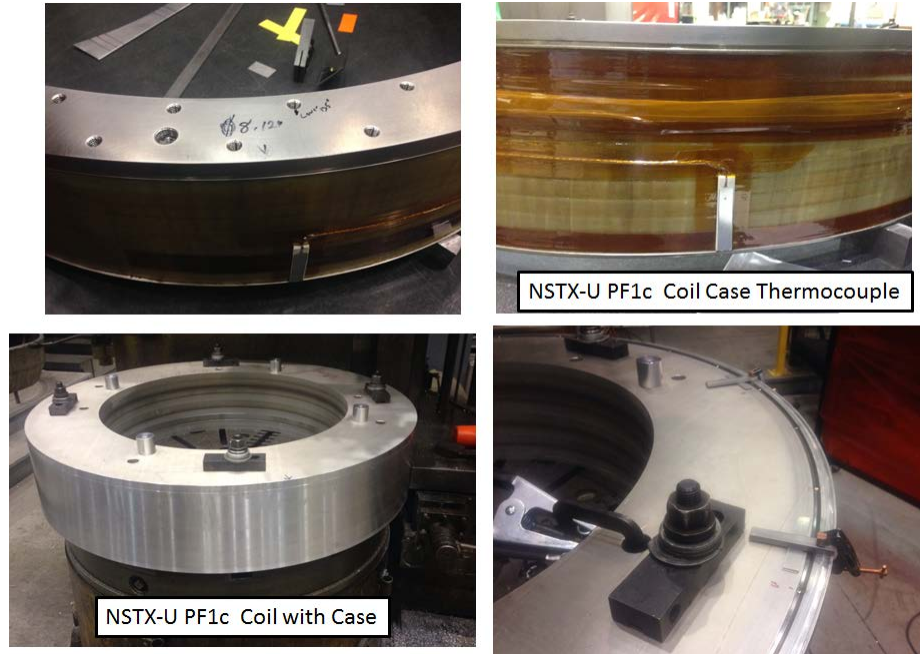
Photos of the Outer Shell Welding
